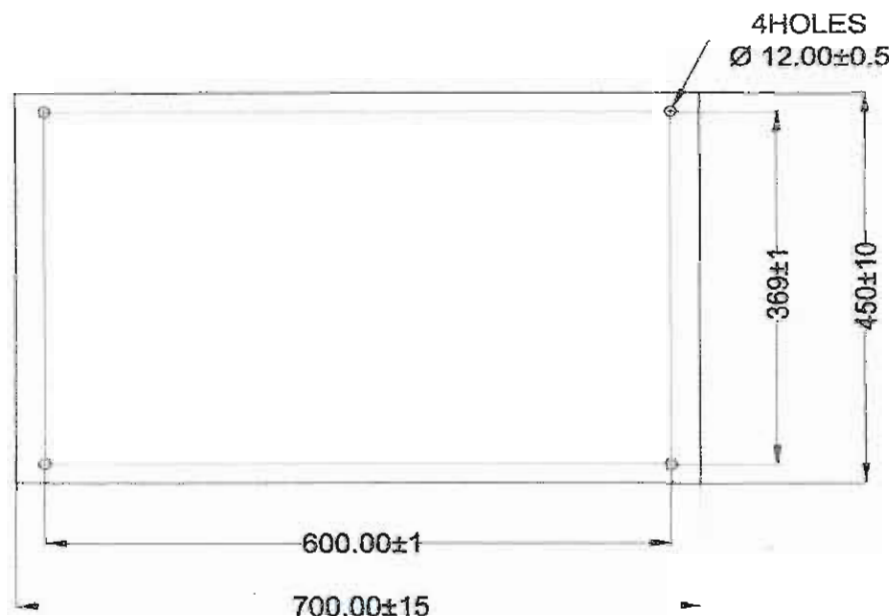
Onboard KAVACH mounting plate 16 mm thick
